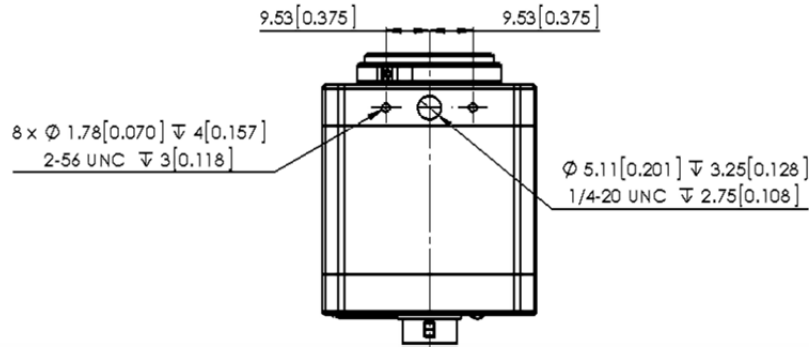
Basic Mechanical Dimensions of the Tripod Mount adapter and 2-56 mounting holes (all dimensions are in mm [in])
